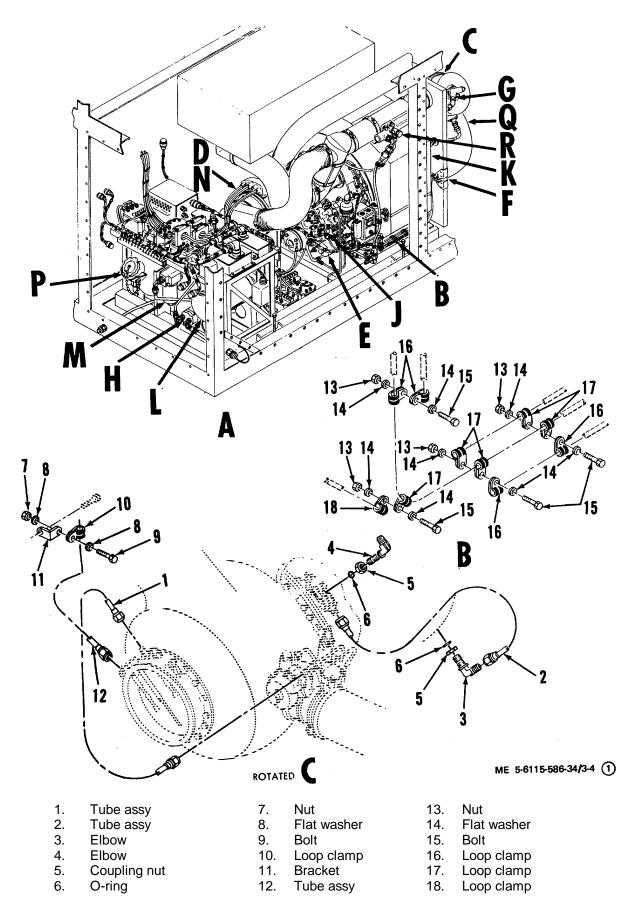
Engine and skid plumbing installation. (sheet 1 of 5)
